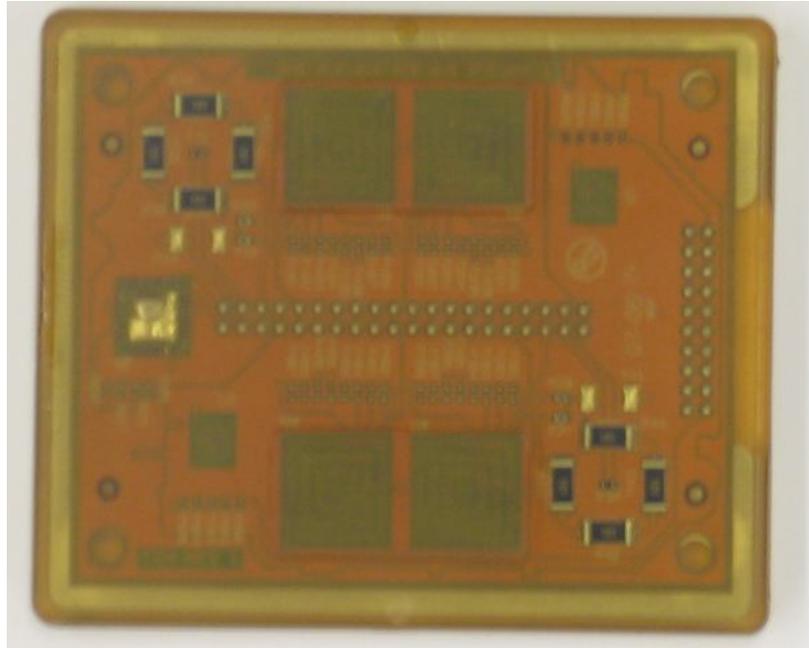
Top View of Epoxy Overmolded Test Vehicle
